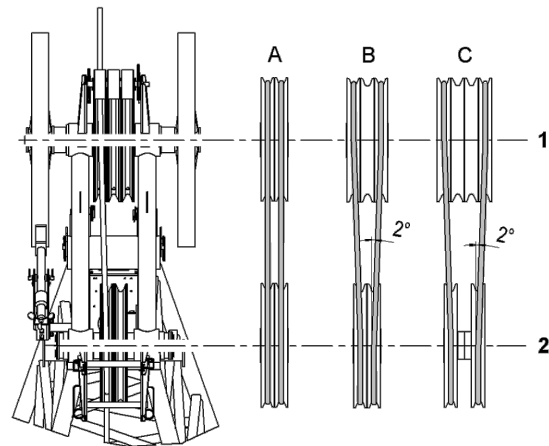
Run of the rope when two ropes pass over the jib head section
